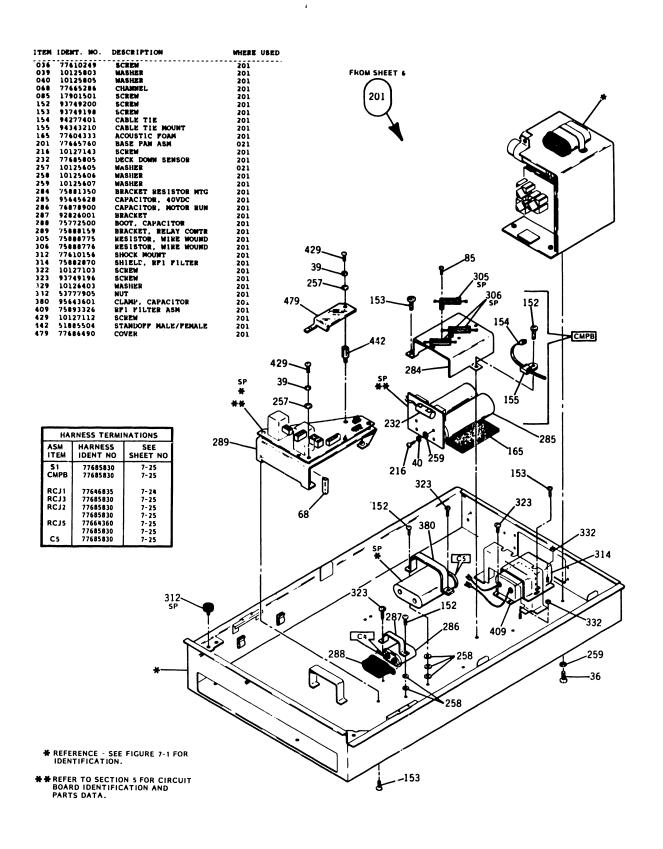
BASE PAN ASSEMBLY (2 OF 2)
